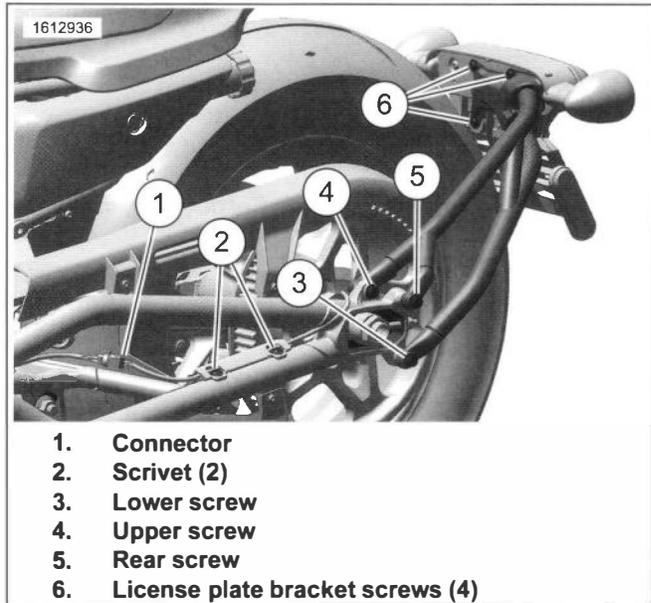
Rear License Plate Module Swingarm Mount COMPLETE
